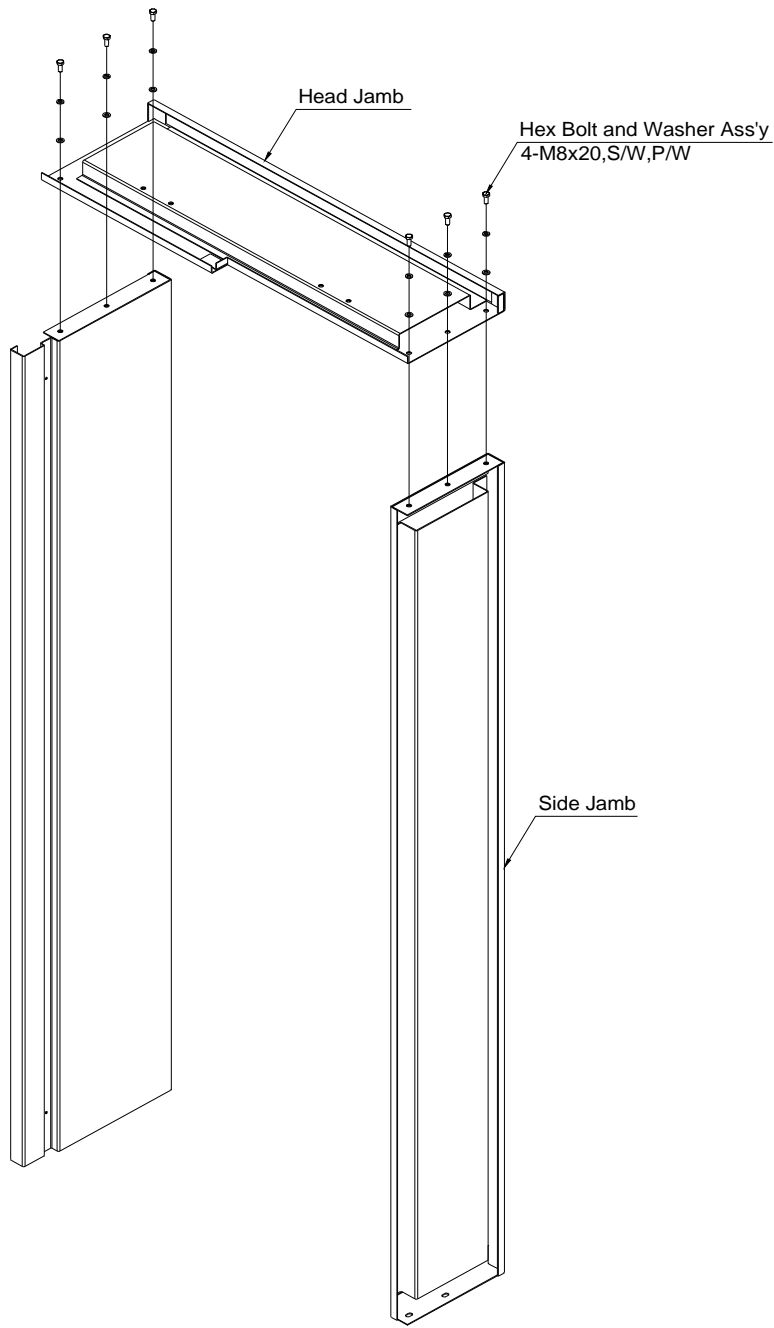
STRUT AND HEADER FRAME ASSEMBLY
